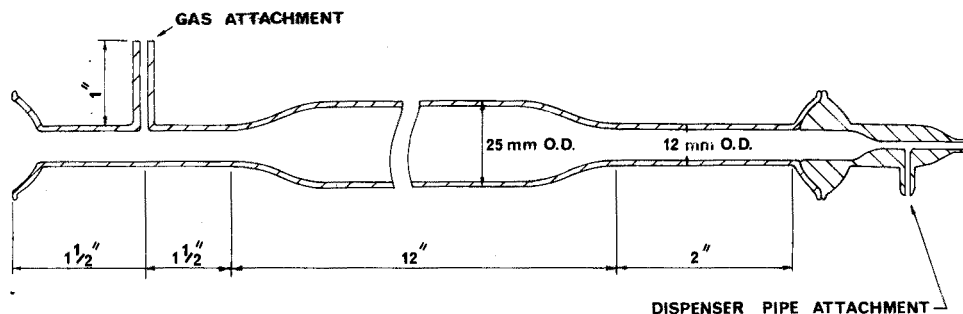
Quartz combustion tube and condenser attachment adaptor with attachment for dispenser pipet.
